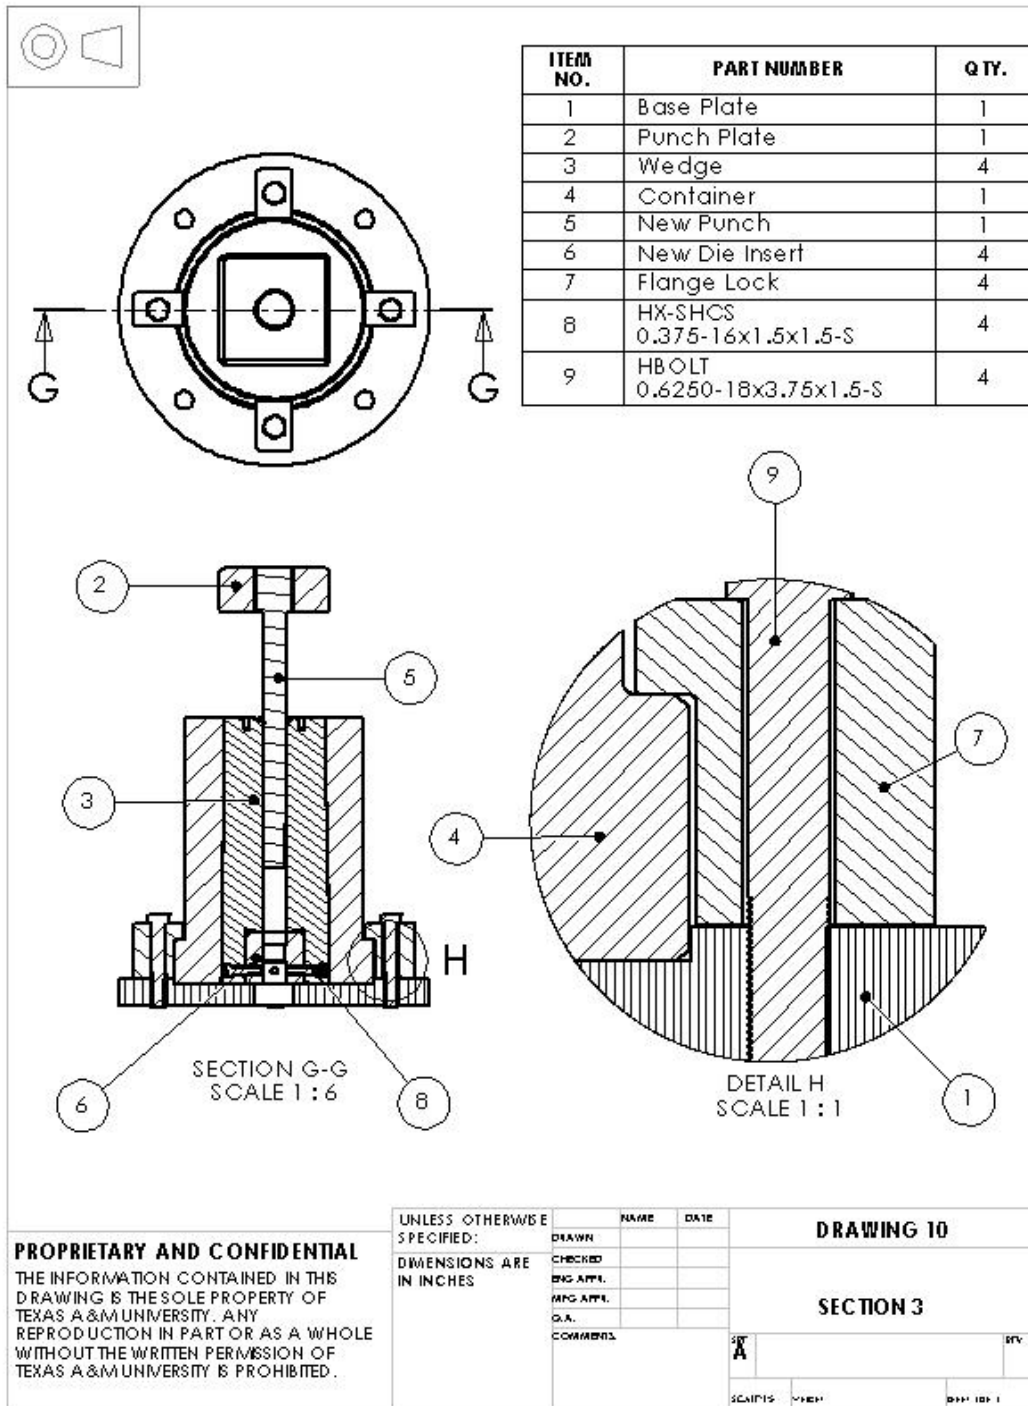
Section through area reduction extrusion tool showing details of the flange lock sub assembly
